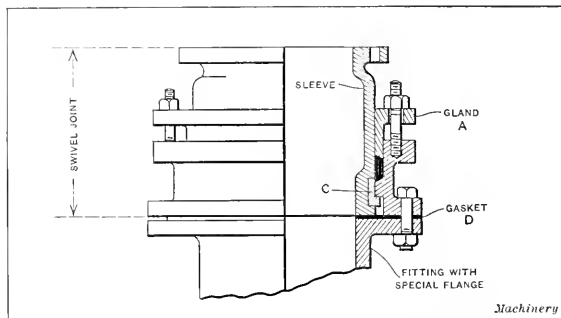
Detail of Crane Co.'s Swivel Expansion Joint
